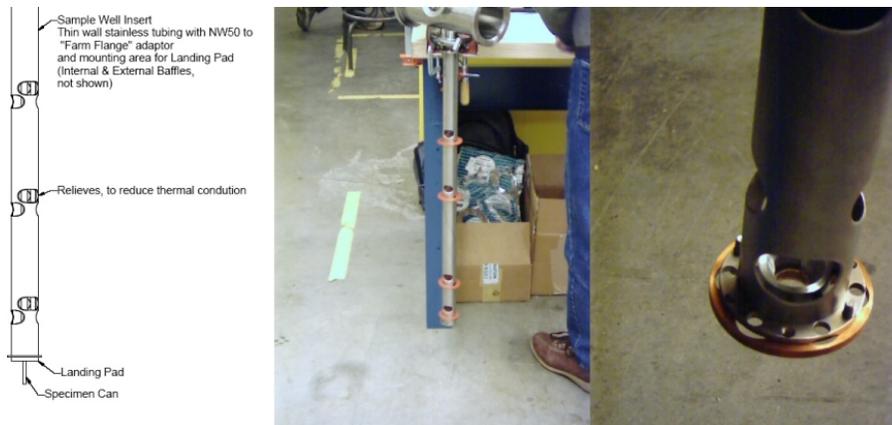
Left: assembly drawing of the variable temperature insert, landing pad, and sample. Center: photograph of the insert being outfitted with baffles and prepared for integration and testing. Right: close-up view of the landing pad, designed to mate with the custom sample holder which uses conventional vanadium sample cells. Note that the landing pad insert is installed into the permanent well of the cryostat, and does not move during FERNS operation
